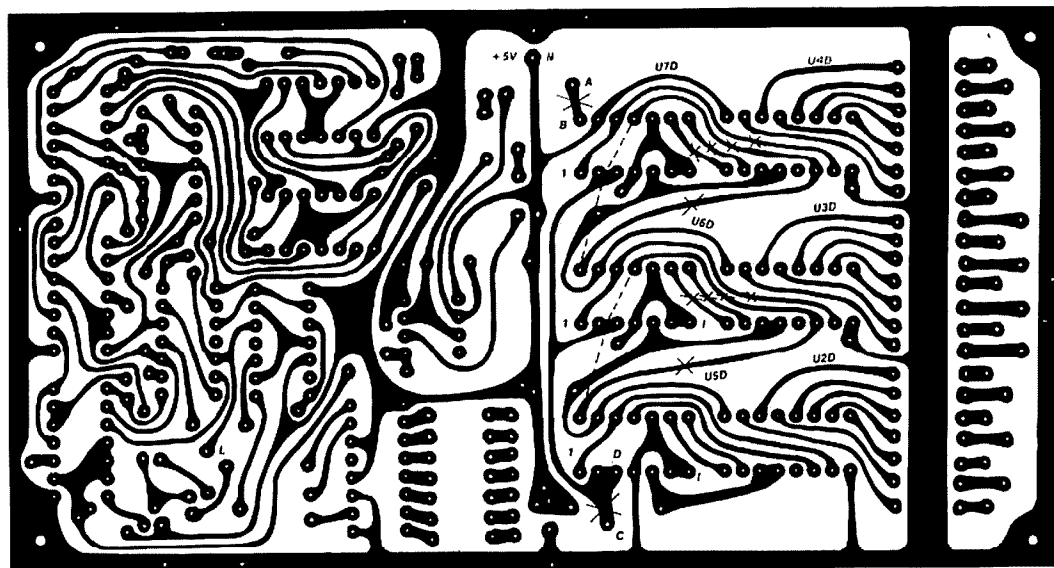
Foil side of Deluxe Memory Keyer driver board. Cut foil at 12 points marked with X. Connect wires from speed adapter board to identical letters on driver board. Add two jumper wires as indicated by dotted lines.
